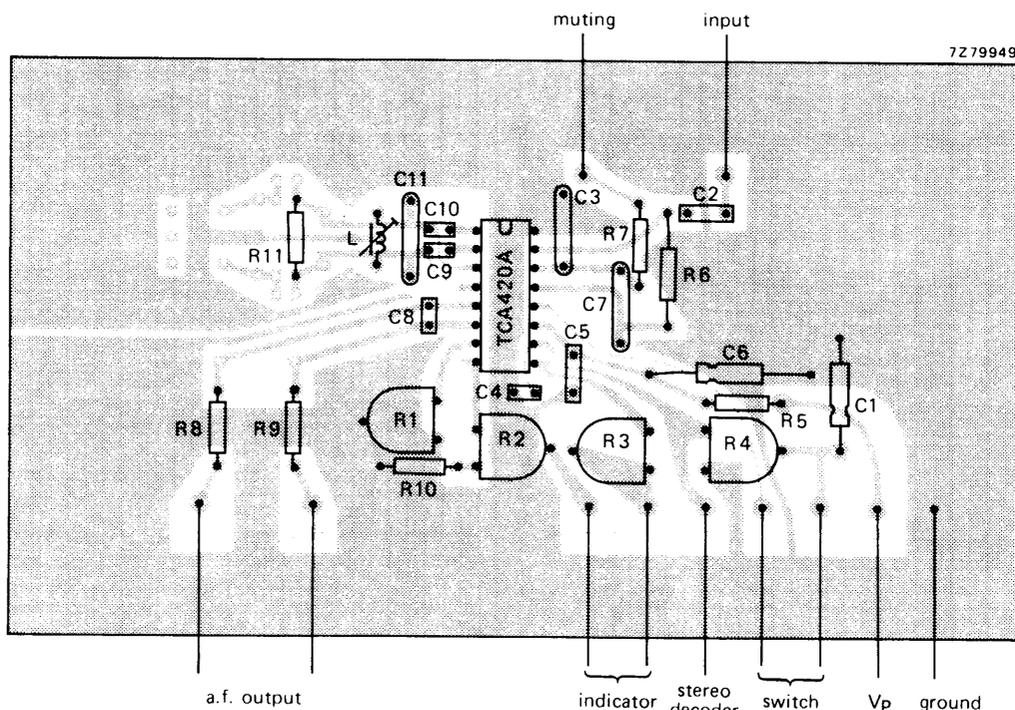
Printed-circuit board component side, showing component layout. For circuit diagram see Fig. 3.
